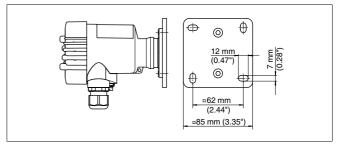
VEGADIS 61 for wall mounting, bottom view of mounting plate.
